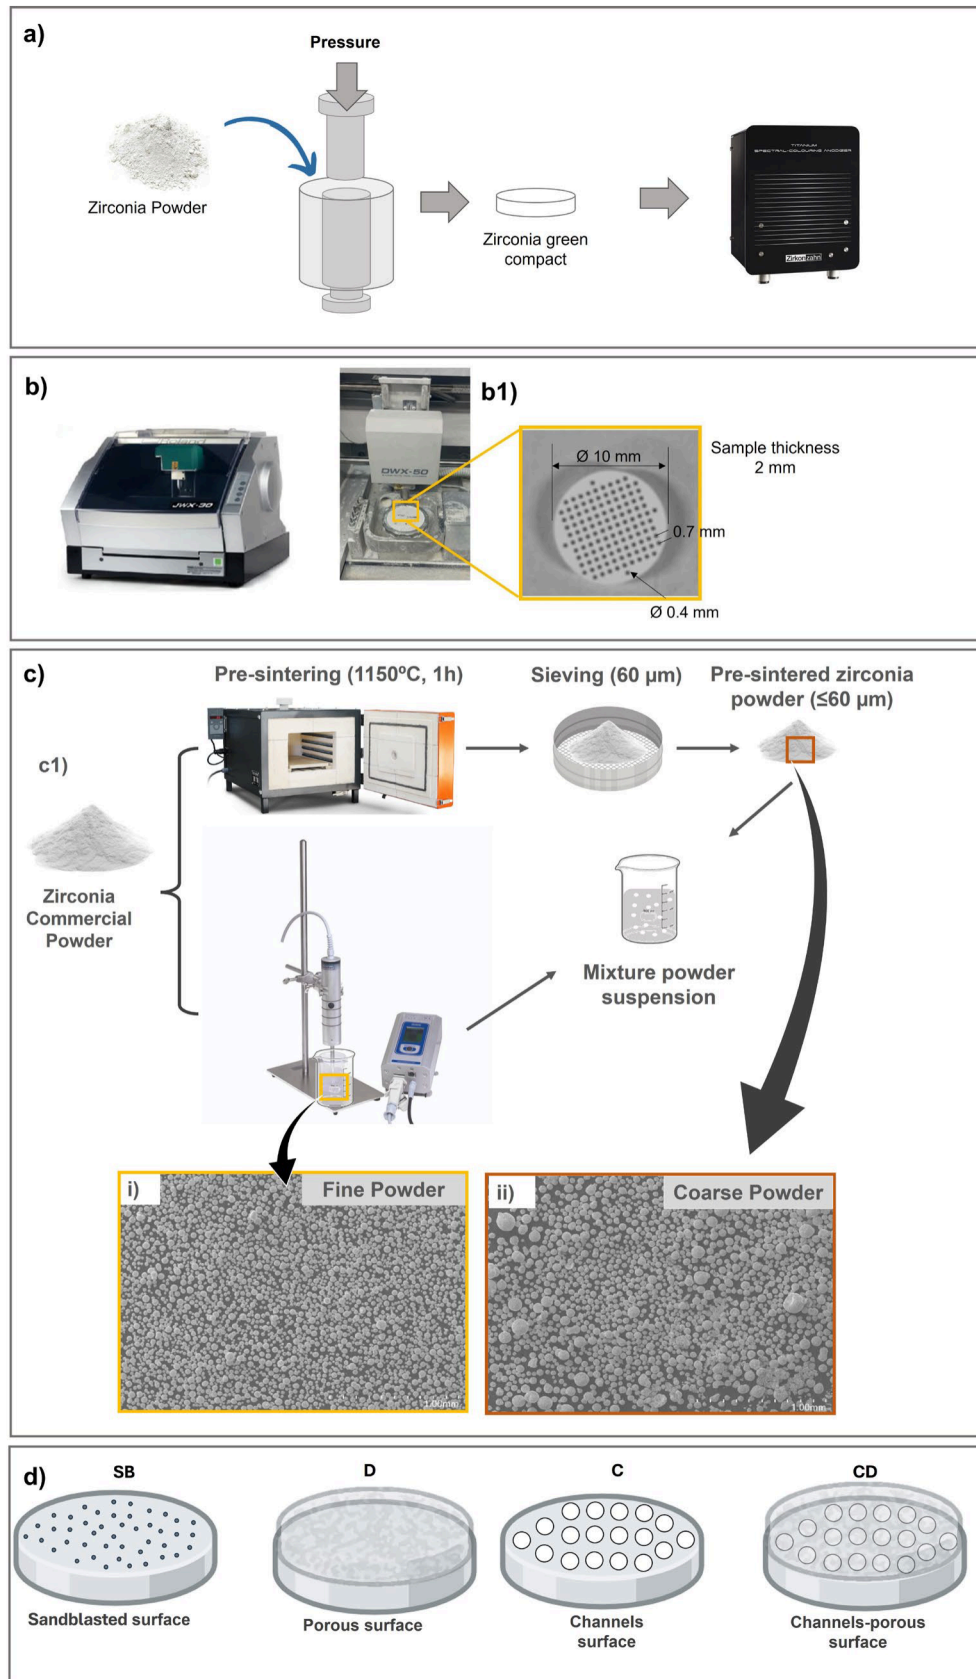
| Schematic representation of zirconia specimens' production. (a) zirconia green compacts production; (b) zirconia channels structure manufacturing by CNC milling, Roland DWX 50 CNC milling machine; (b1) Machining system and the final channeled zirconia specimens at green state; (c) zirconia powders preparation: (i) fine powder and (ii) coarse powder; and (d) all produced zirconia specimens. Figures adapted from Proença et al. [21].
